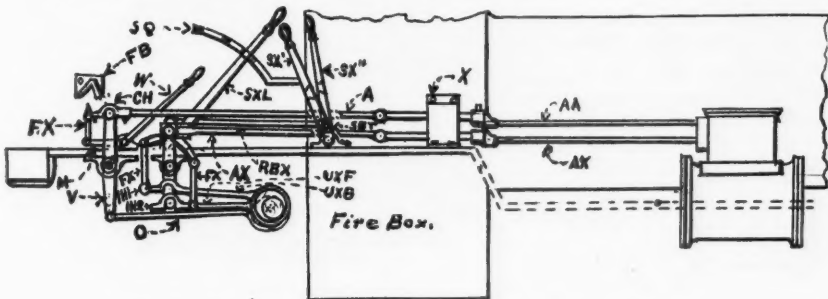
Baldwin "D" Hook Gear on Crampton of 1849.
